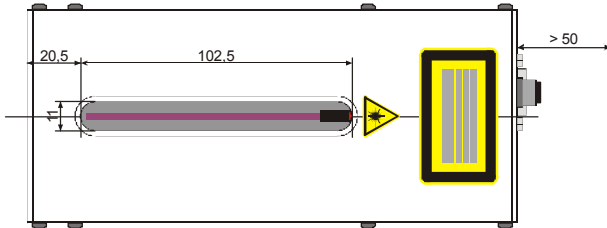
mechanical dimensions (measurement plane) of the MTE LTDB; all measures in mm
